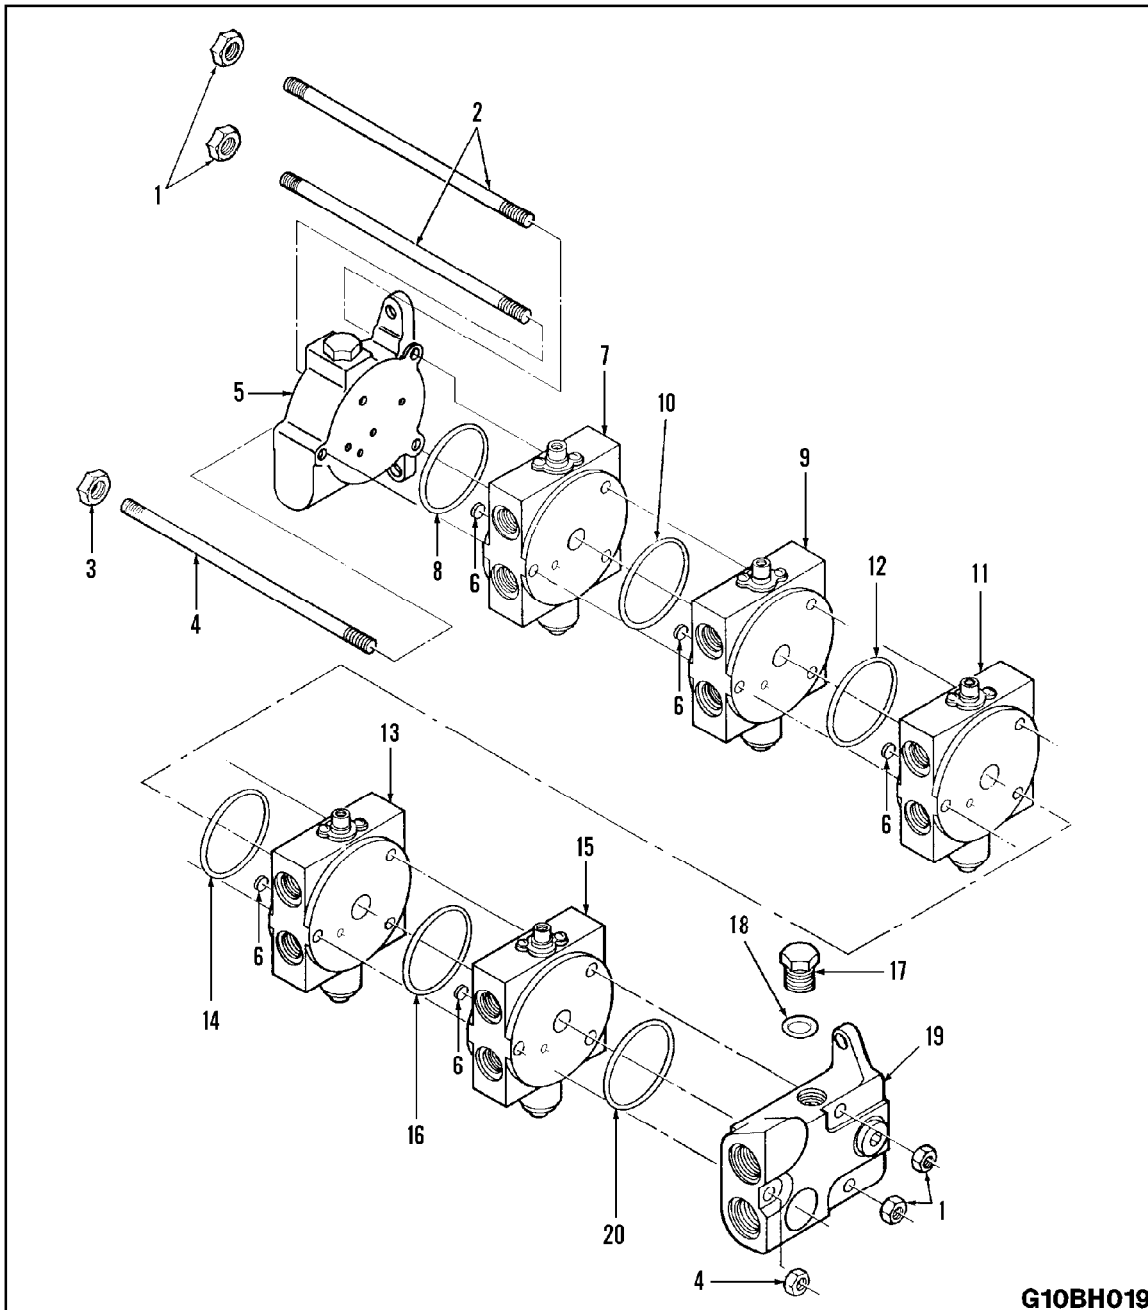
EXPLODED VIEW OF CONTROL VALVE - L.H. BANK
